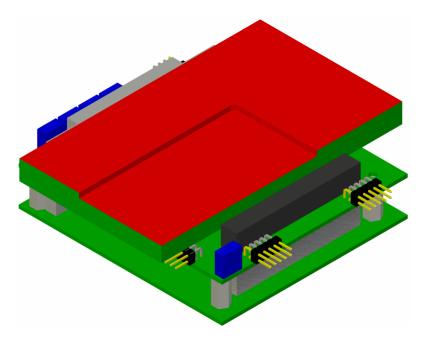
CPU Board and IEEE 1394a Board Assembly
